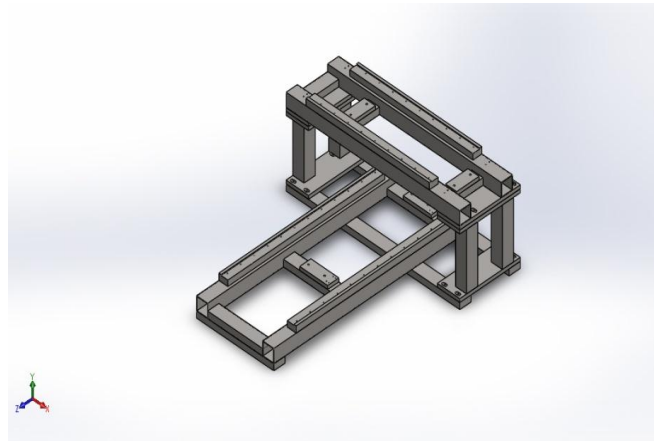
Geometry of PCB Drill Mech SS 300 Structure using static analysis
